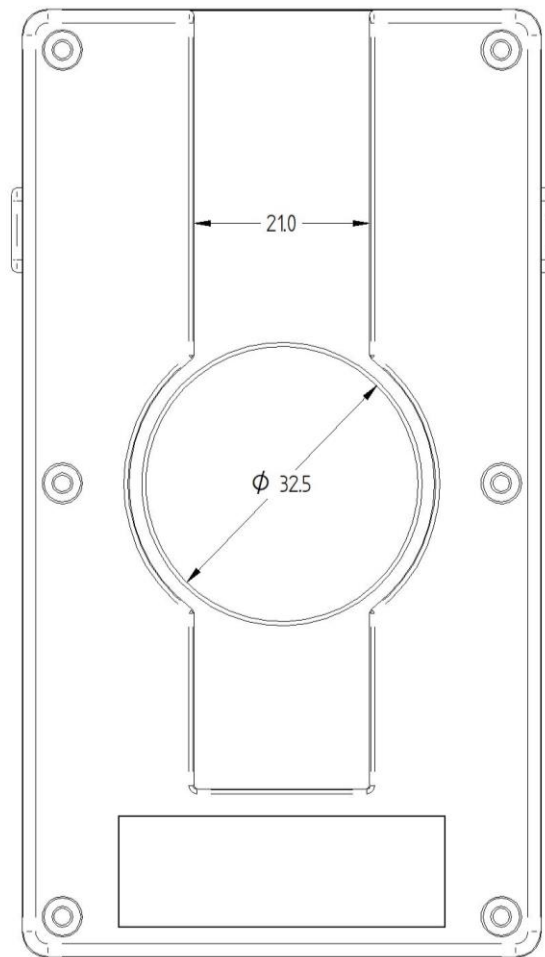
skID R1280I Technical Drawings – Back panel view
